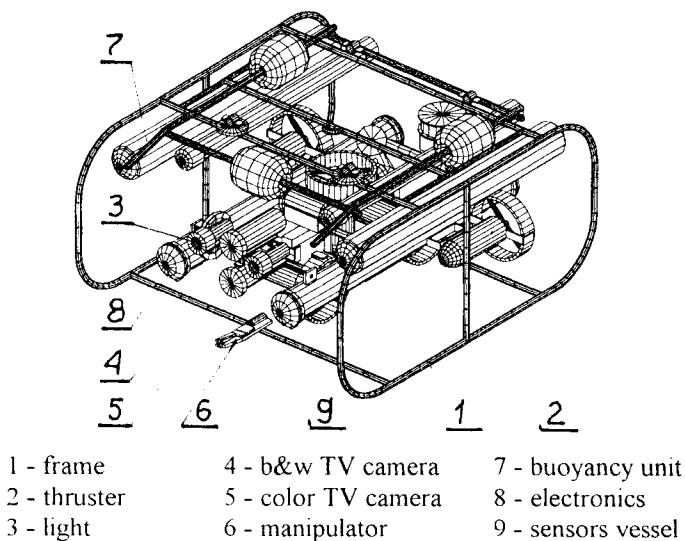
KRAB-2 LC ROV - a carrier of equipment and apparatus, Technical University of Szczecin.
